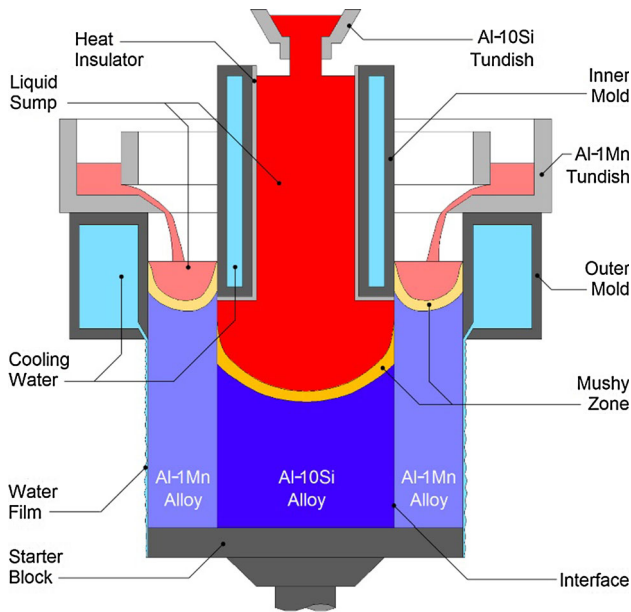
Schematic of the vertical direct chill casting process for preparing the circular clad ingot.
